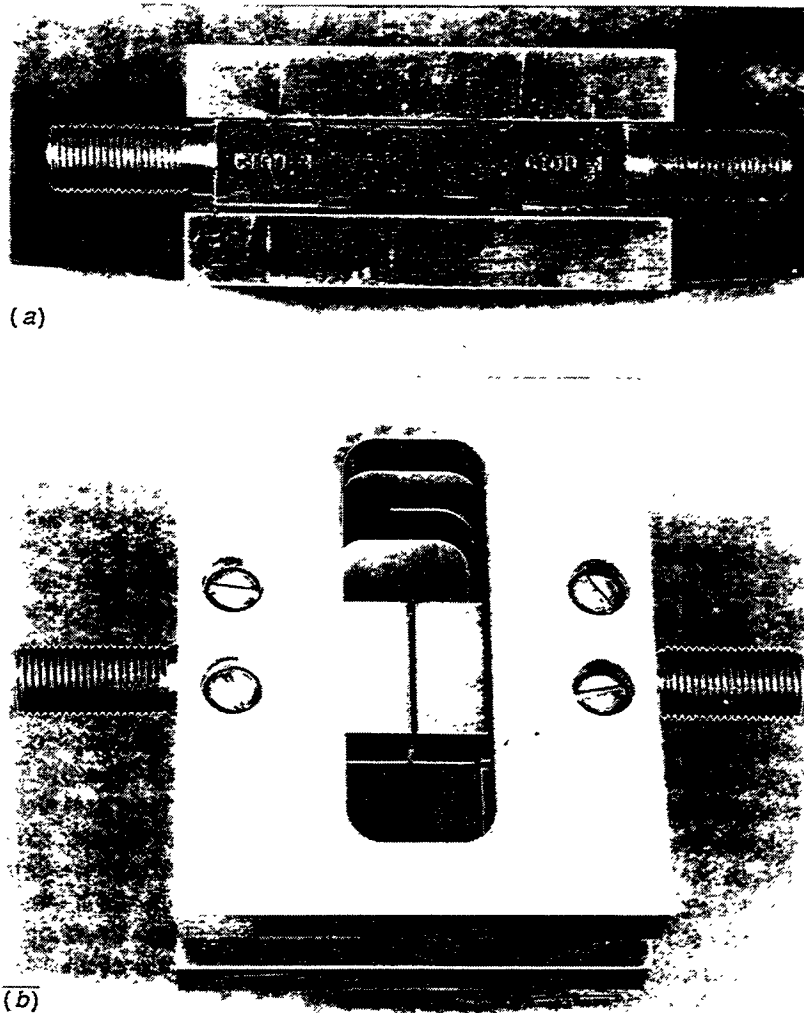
Typical CTOD specimen in final configuration showing machined slot and strongback used to prevent bending during handling: (a) side view and (b) top view
